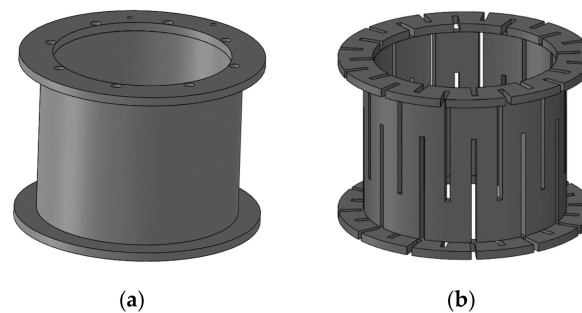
Two configurations of the bobbin for the CPC: (a) Solid bobbin; and (b) Cutting bobbin.
